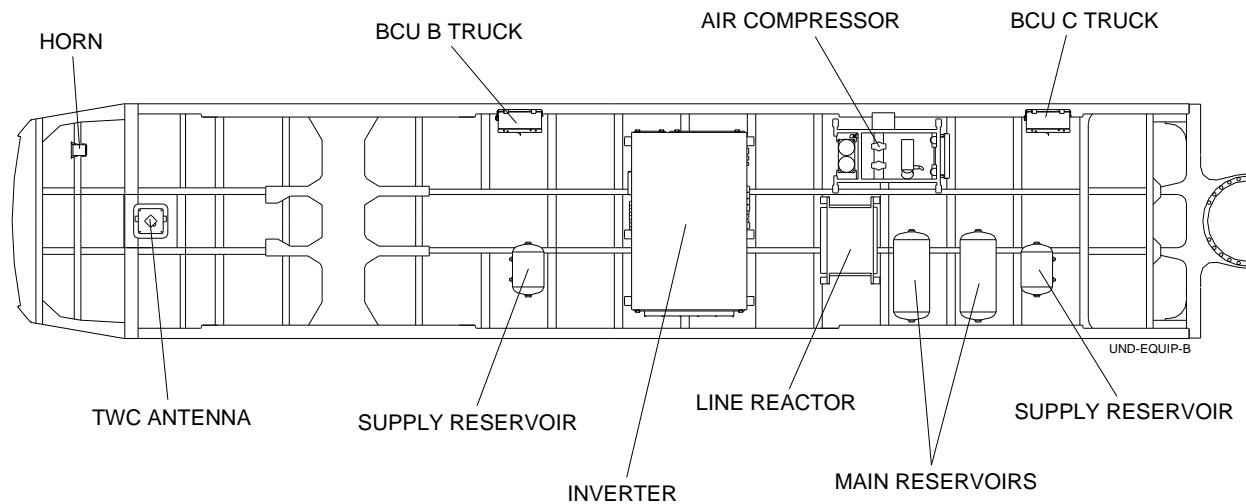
Underfloor Equipment Arrangement, B-Unit
